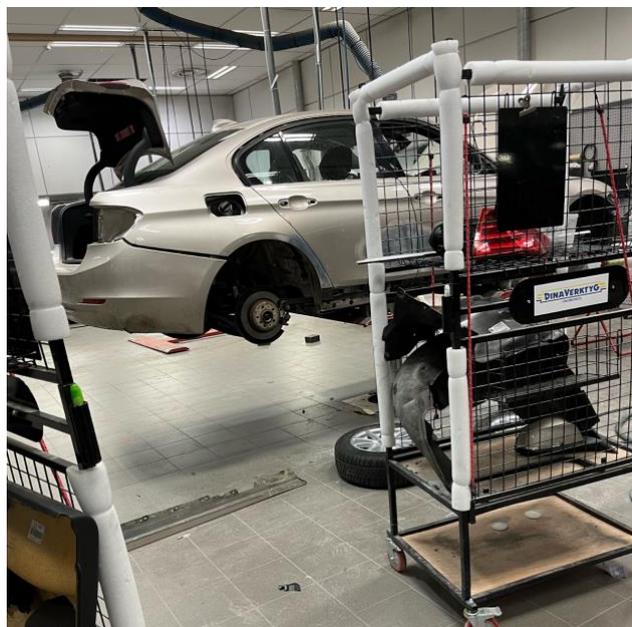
Example of a sheet metal employees works station at the disassembly step. To the right, a cart for the disassembled and functional part can be seen
